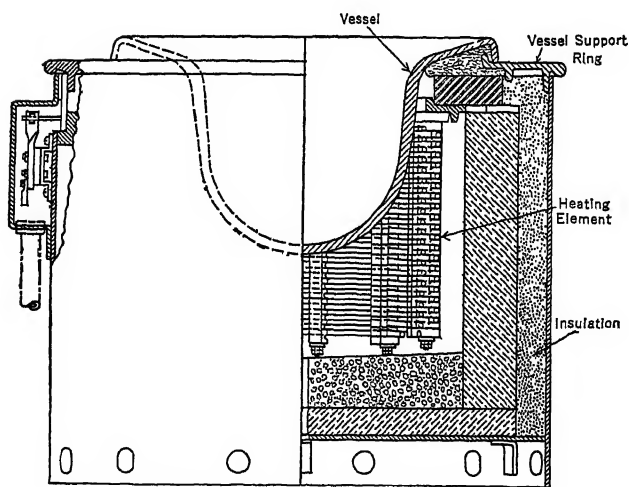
Sectional View of Cylindrical Pot-type Furnace
